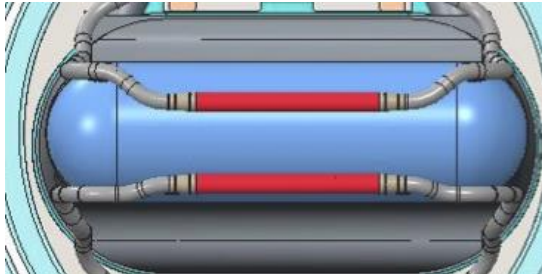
Drawing of the FMITS tubes (red) in front of the target nose cone.
